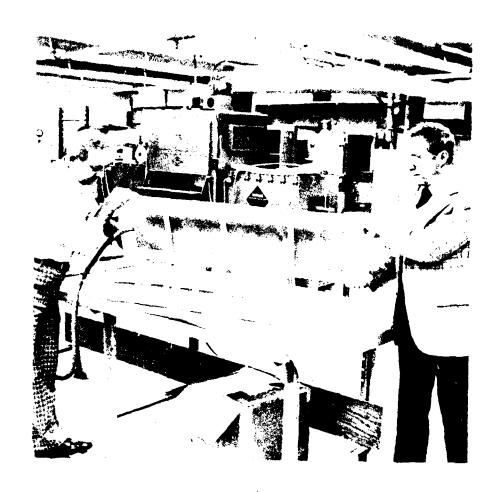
Positioning Top Section of Tool Containing Silicone Pressure Bag
